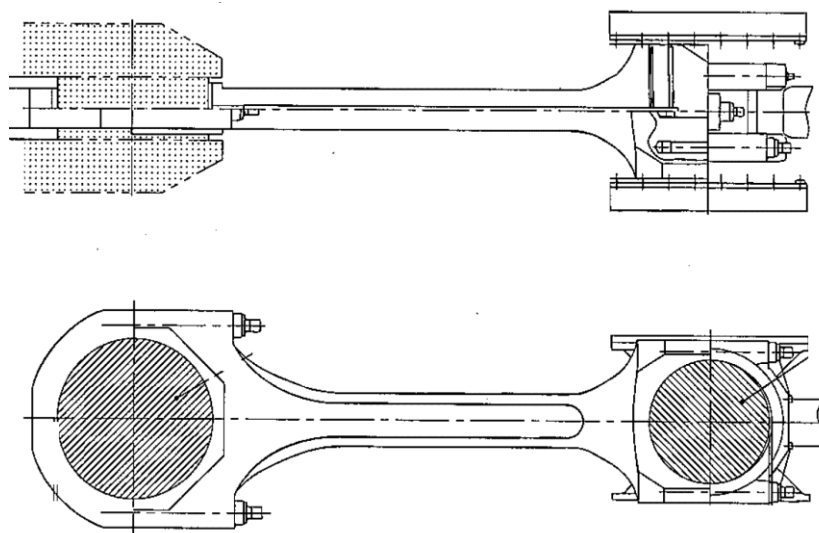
Engine connecting rod 6DKRN 80/230
